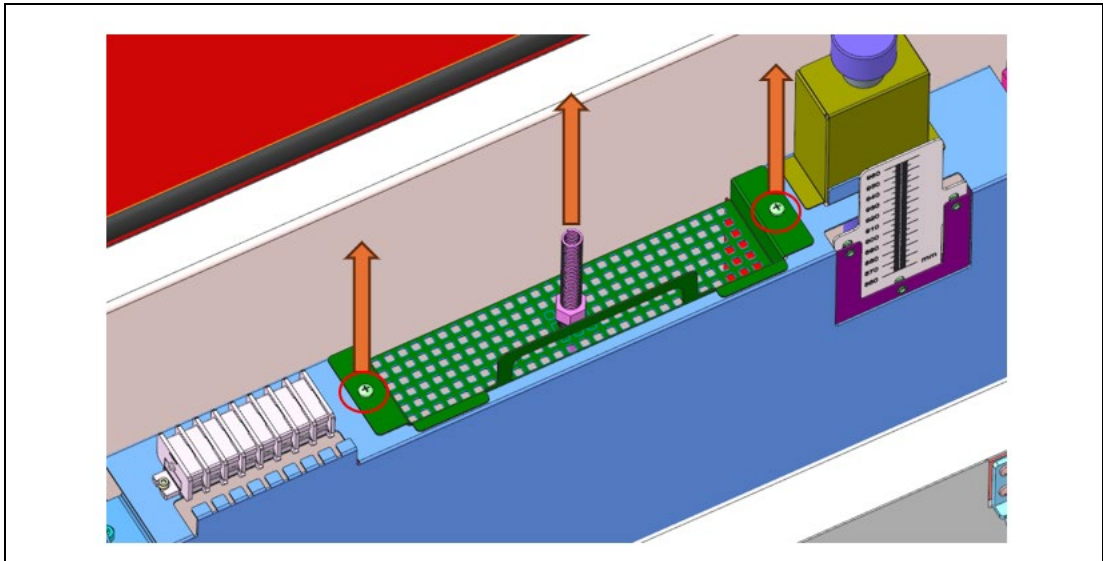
Remove the Screw of Coolant Inlet Temperature Sensor
